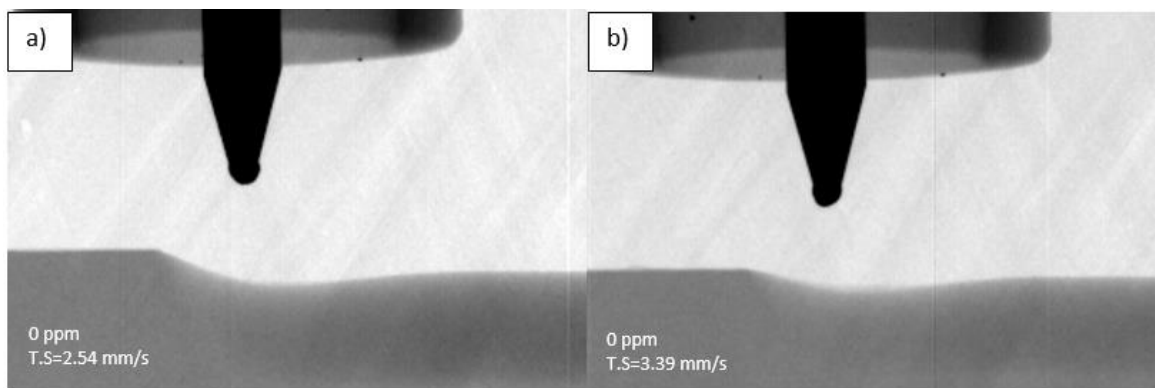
Alloy 4047 welded using 0 ppm of shielding gas hydrogen at a) 2.54 mm/s and b) 3.39 mm/s.
